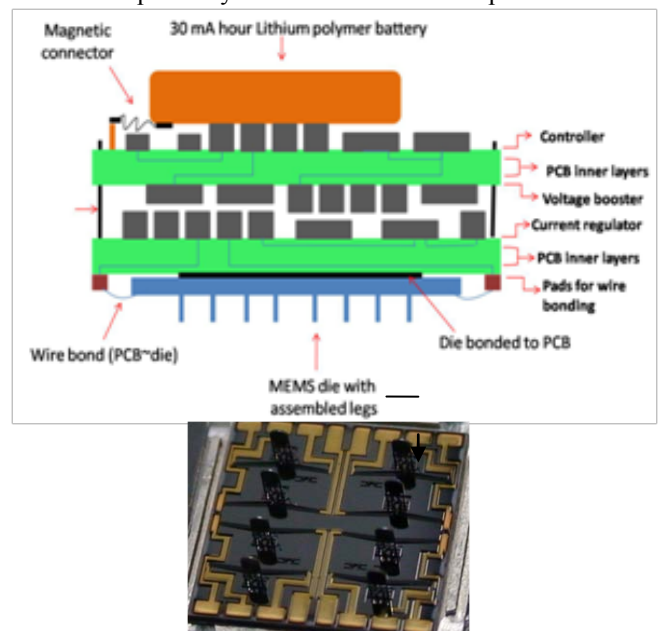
ARRIPede: Top-Microrobot package cross-section; Bottom: MEMS substrate with assembled legs.
